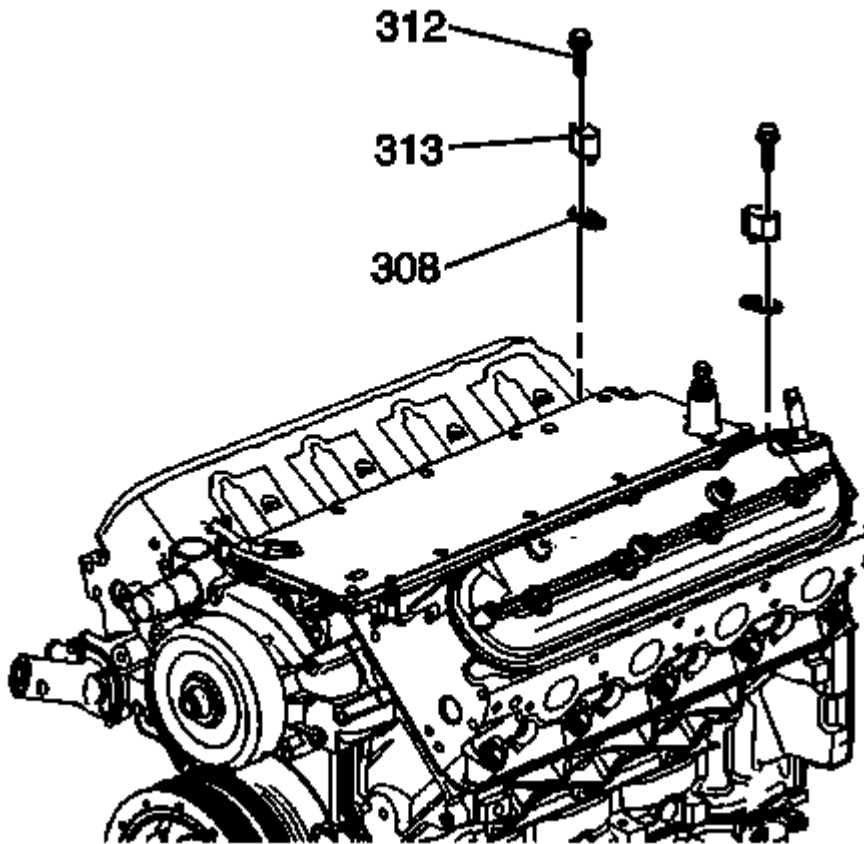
Engine Coolant Air Bleed Cover, Bolts & Seals
